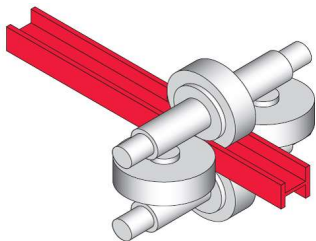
Example of roll layout (SteelConstruction.info, n.d.)
